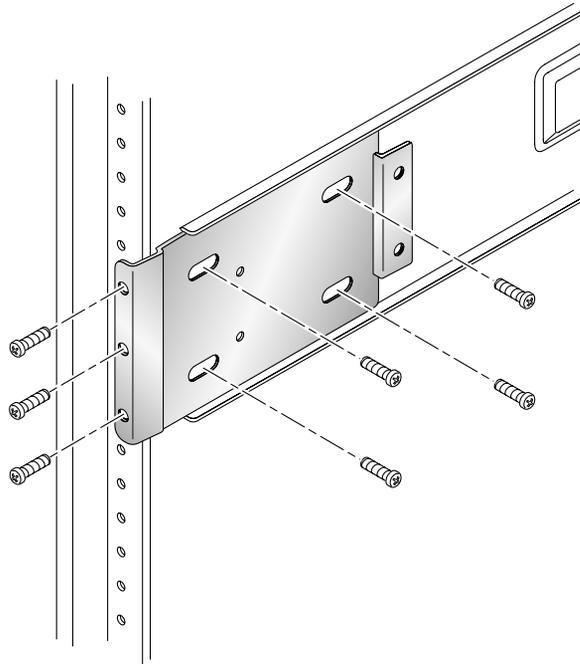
Mounting the Back Expansion Bracket of the Side Rail
